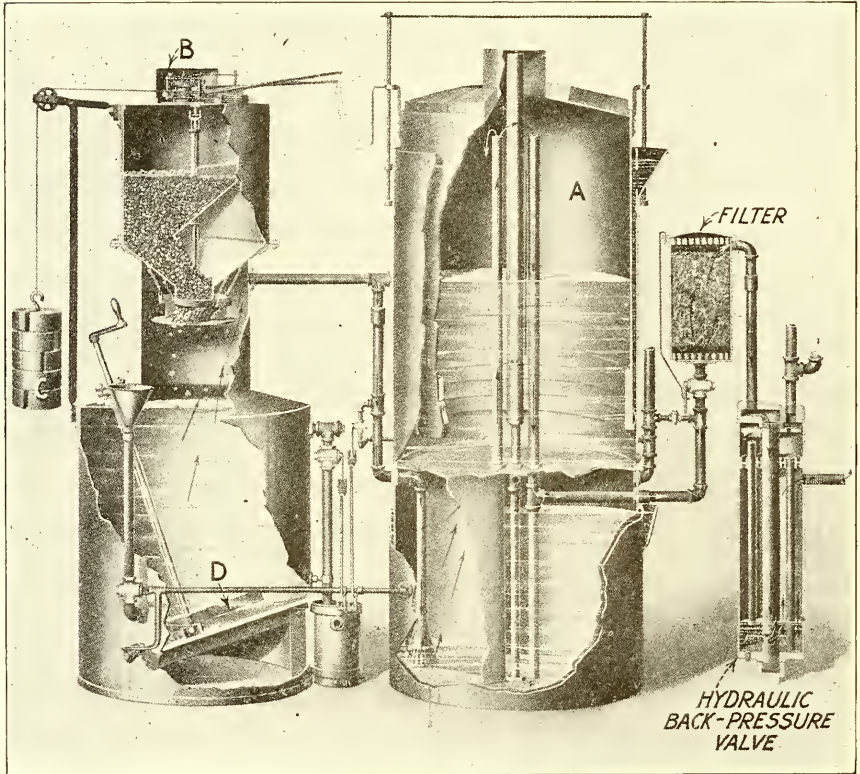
Sectional View of Oxweld Low-Pressure Generator Showing Interior Arrangement and Direction of Flow of Gas.
